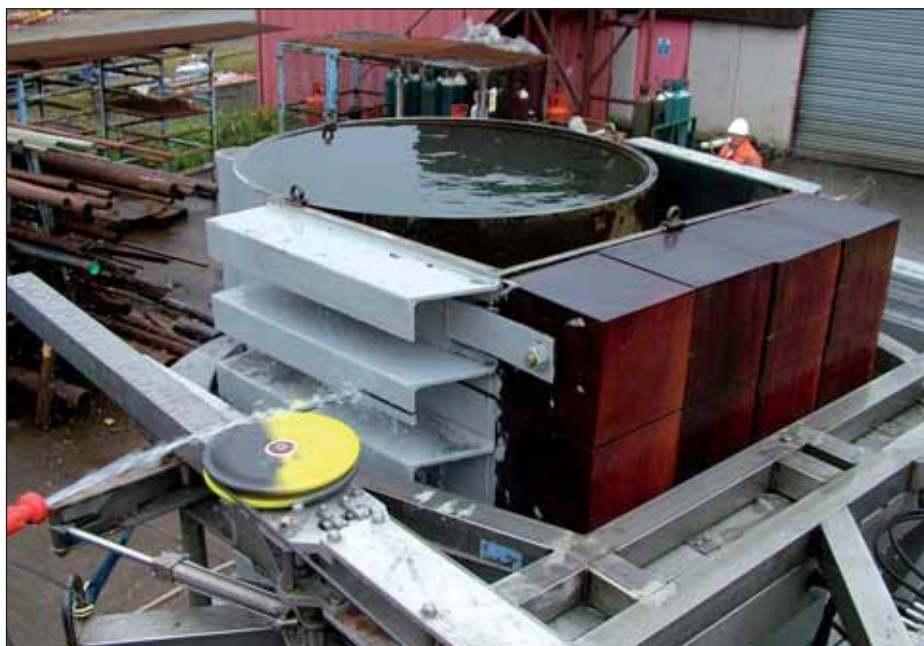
FAT Test, Diamond wire cutting 52" pile c/w launch runner hardwood
